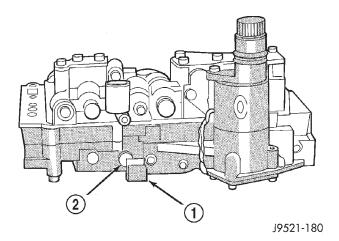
Seating 3-4 Accumulator On Lower Housing
